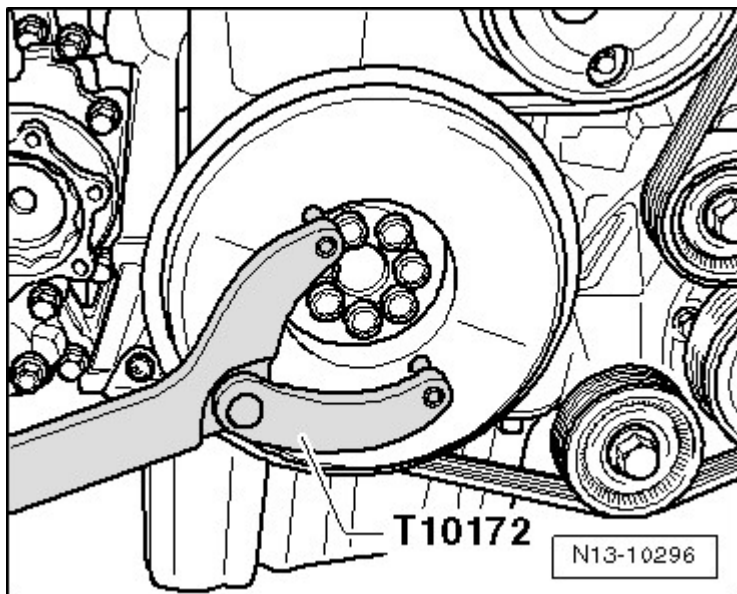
Loosening and Tightening the Vibration Damper Bolts
